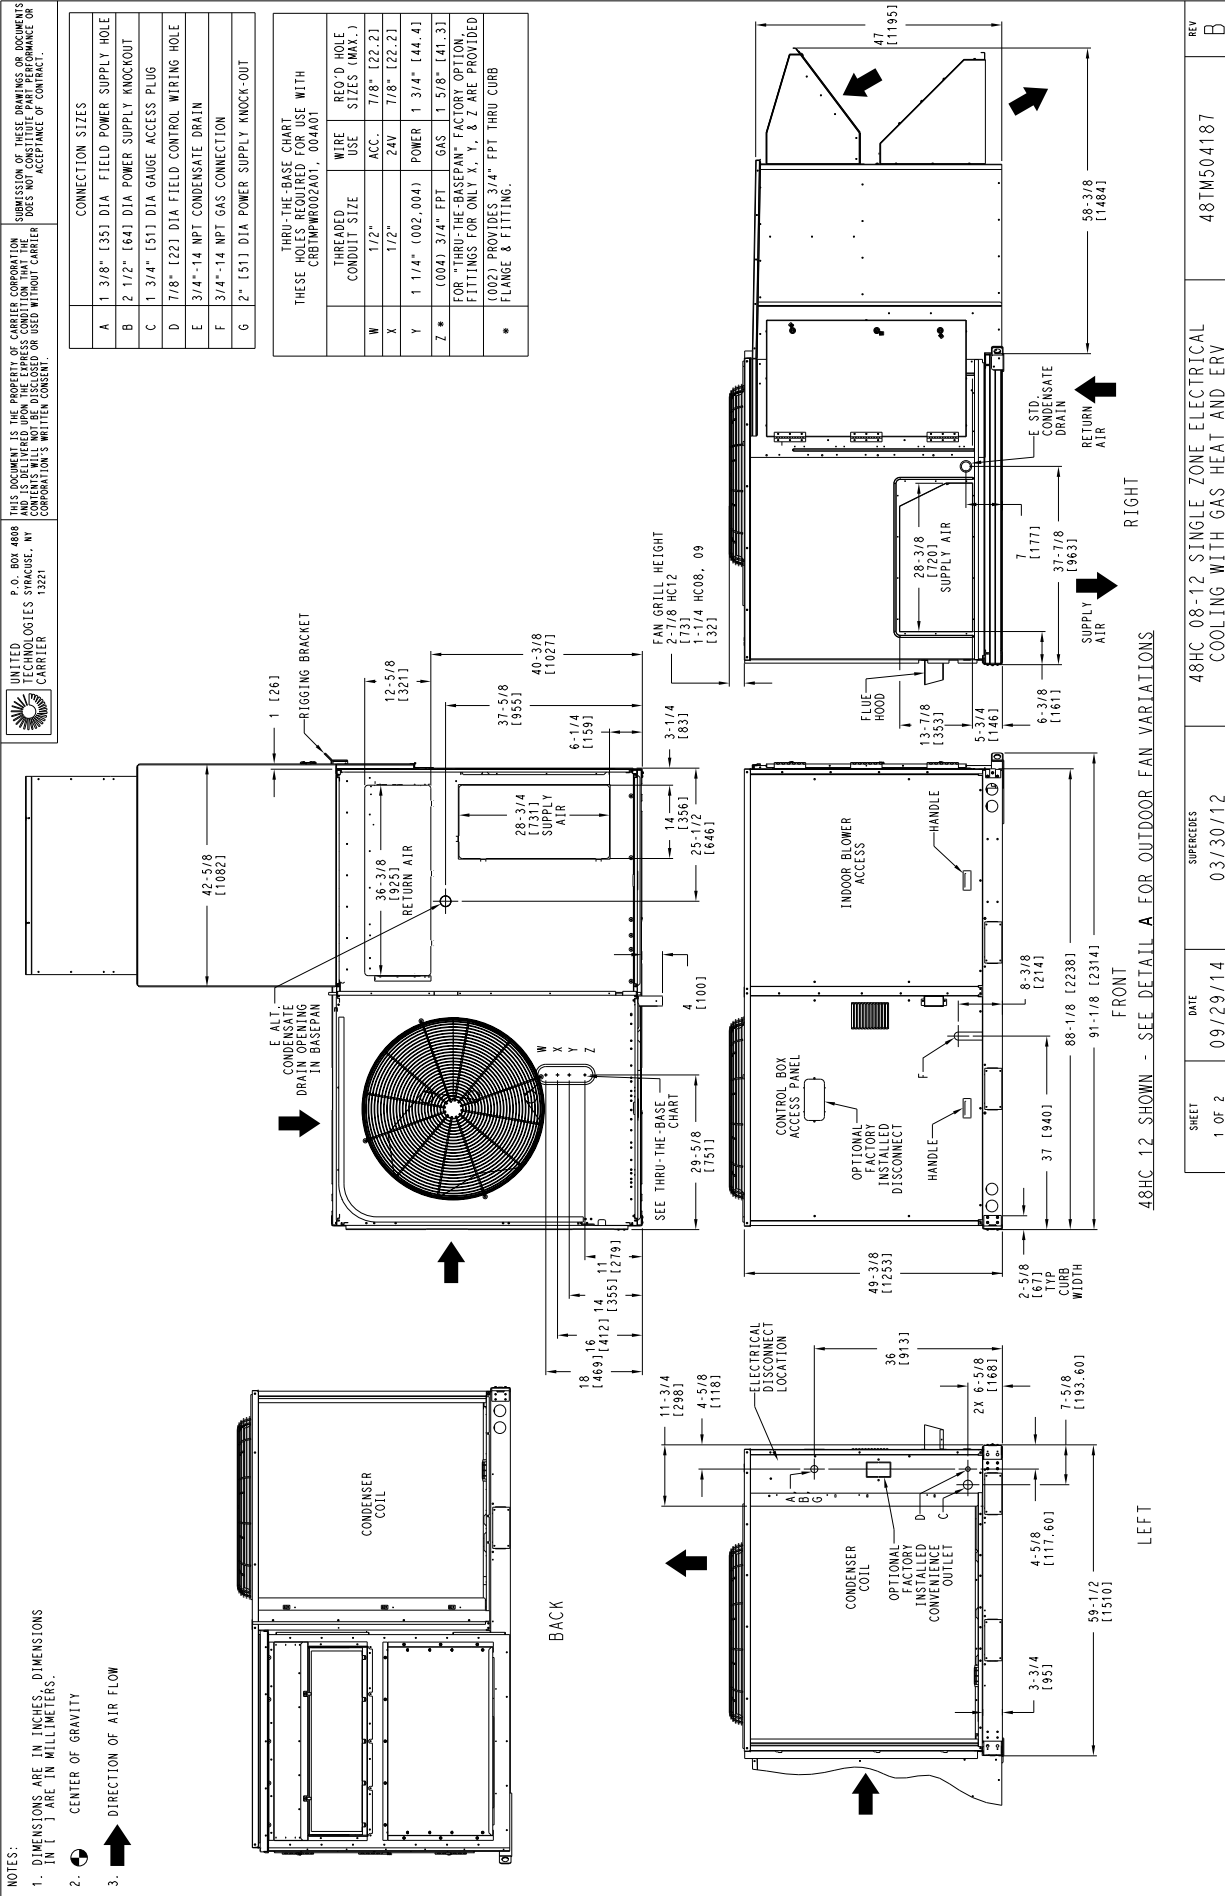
48HC-08-12 Single Zone Electric Cooling with Gas Heat and ERV (Sheet 1 of 2)
